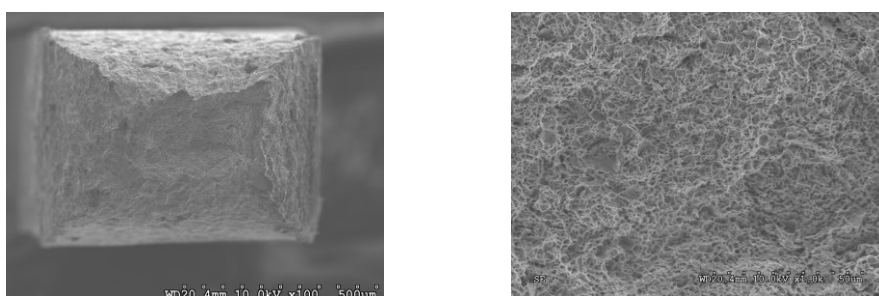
Exemplary fracture surface of iron sintered via Impact Sintering method
